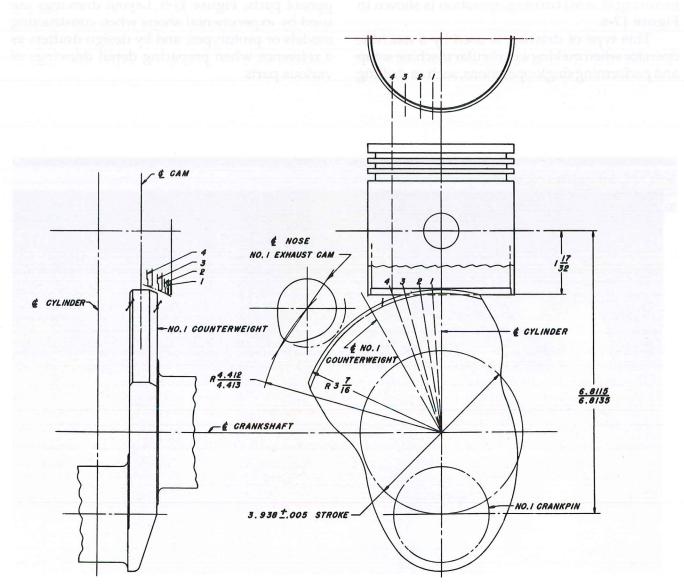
A layout drawing used to determine the largest radius crankshaft counterweight that can be used and still maintain clearance between the counterweight and the cam and piston. (General Motors Engineering Standards)
